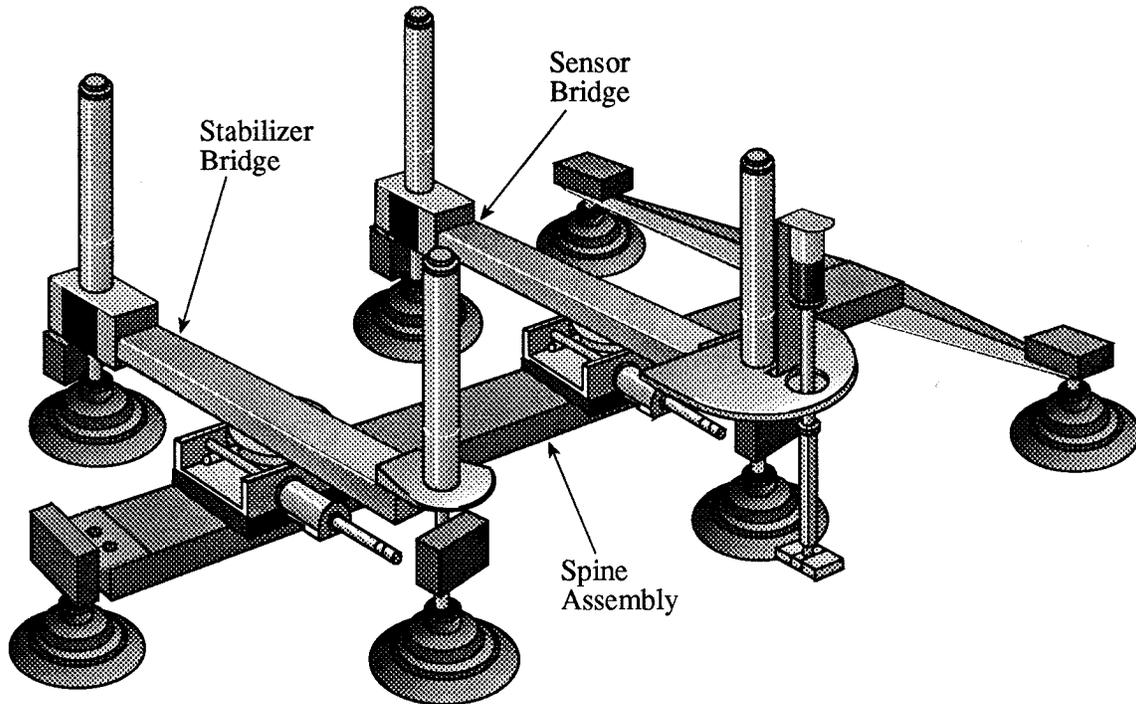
DRAWING OF THE CRUCIFORM ROBOT
